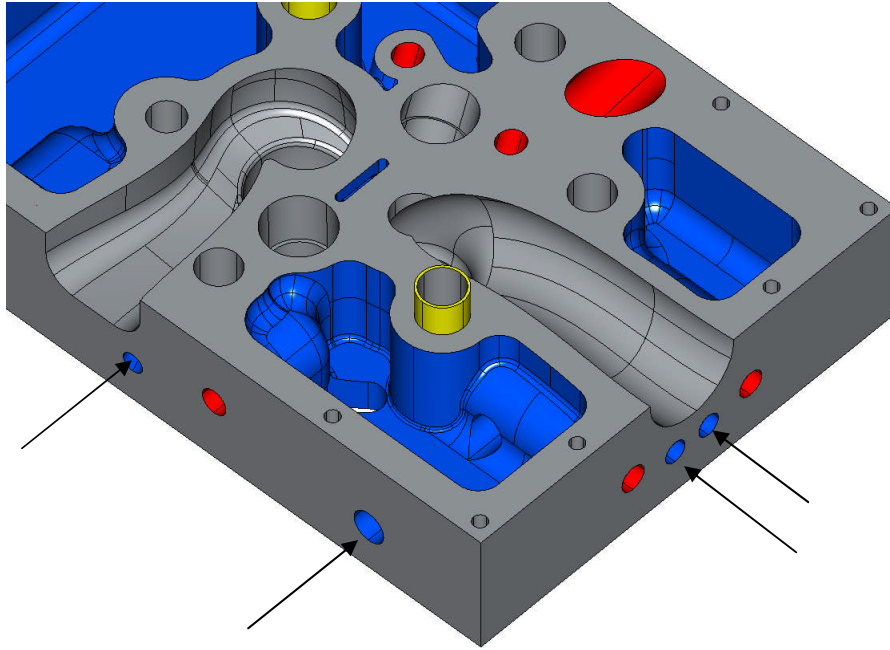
Cylinder head cross drilled cooling channels below the exhaust and the inlet port
